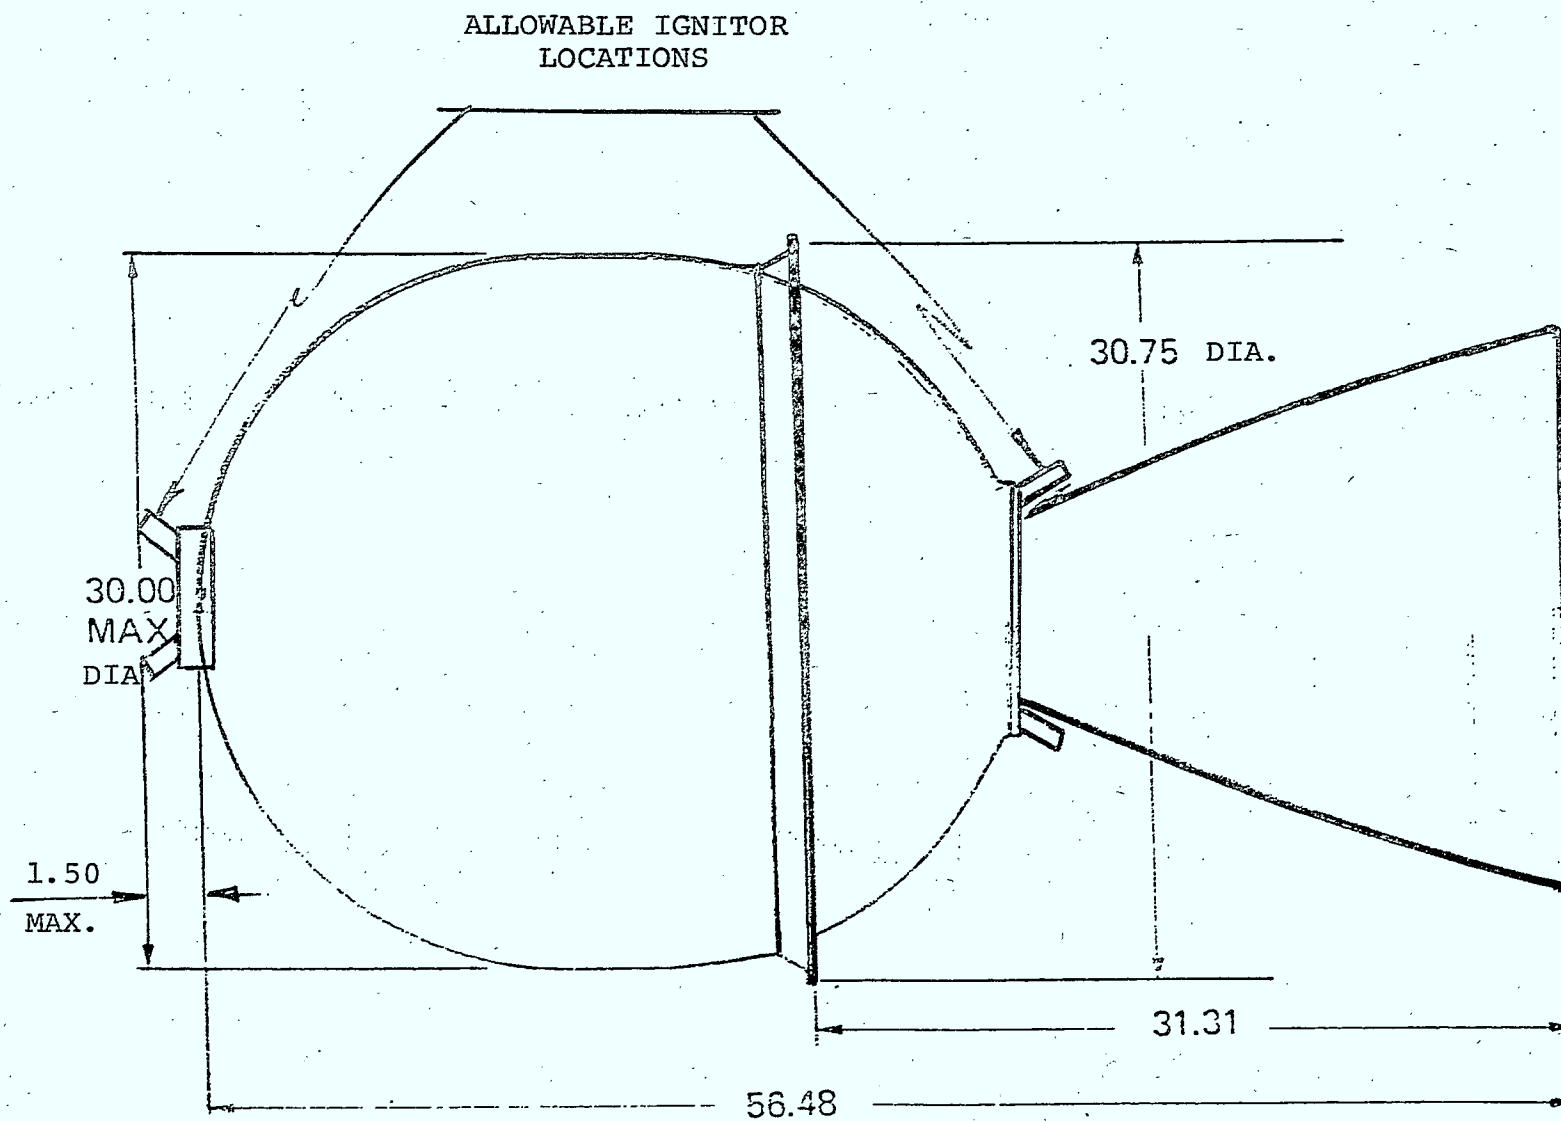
APOGEE MOTOR ALLOWABLE DIMENSIONS
